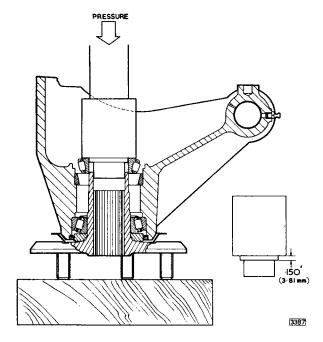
Pressing in the hub inner bearing inner race using Master spacer, (Churchill Tool No. J.15)
